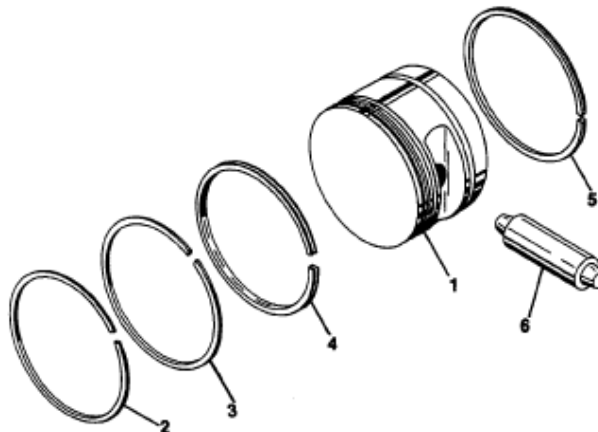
PISTON AND RING ASSEMBLY
